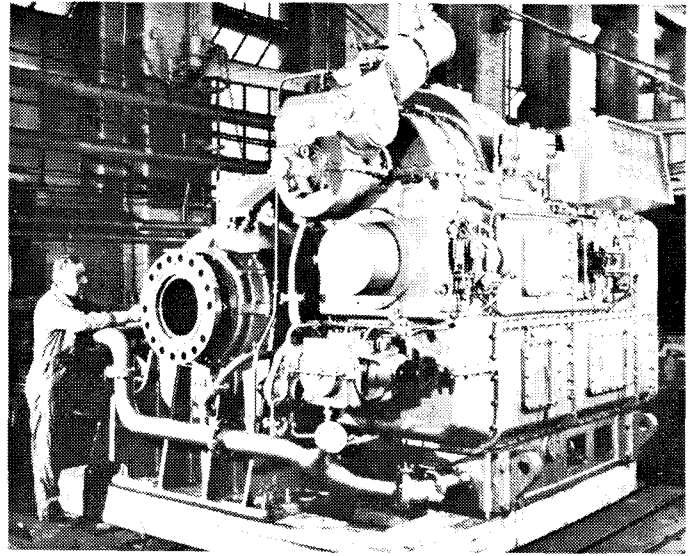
View from aft end of R.N. Type 42 main gear unit
